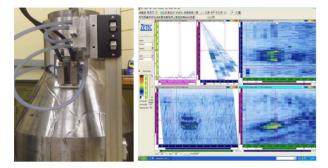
Finger print of dissimilar metal weld test specimen and ultrasonic signal
